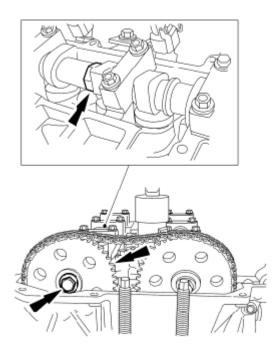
Identifying Camshaft Alignment Plate Courtesy of FORD MOTOR CO.
